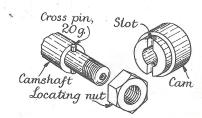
A sound method of securing contact breaker cam to the shaft.
